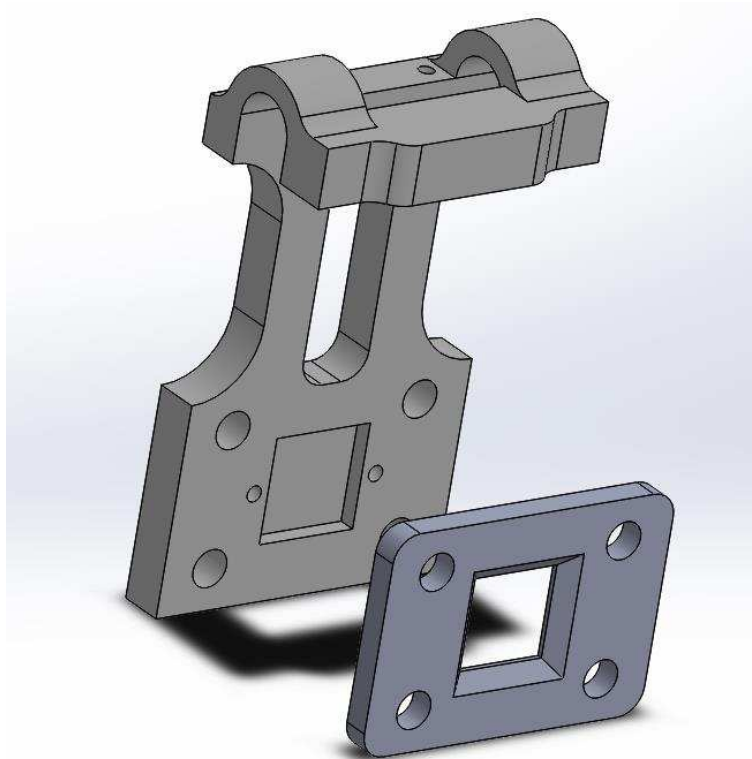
Part assembly for electroplating jig used to hold 2cm x 2cm wafers
